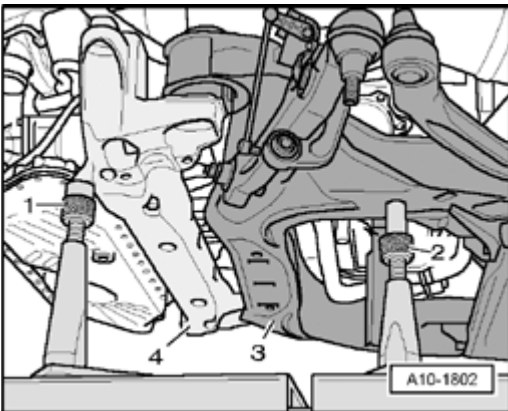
Identifying Subframe, Left/Right Of Engine Carrier & Support Elements
